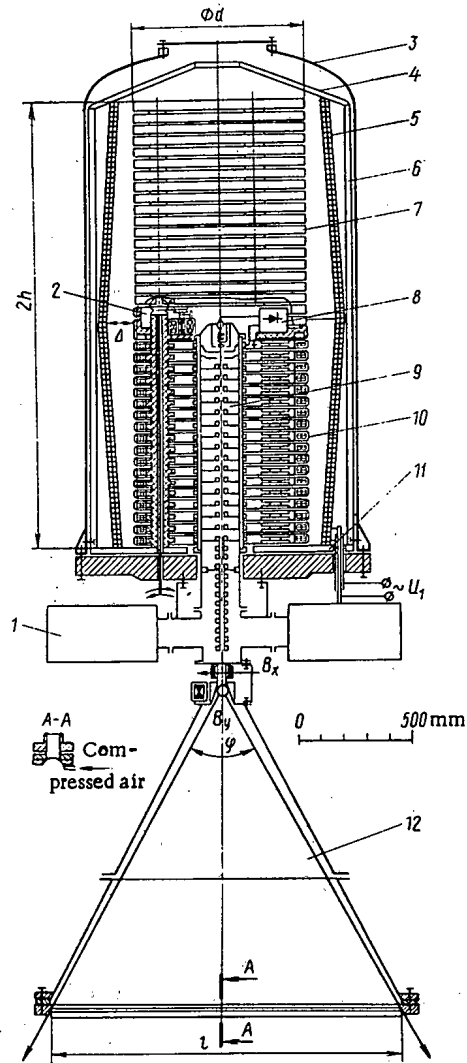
Design of the ÉLV-3: 1) vacuum pump; 2) high-voltage electrode; 3) case; 4) conical magnet; 5) primary winding; 6) cylindrical magnet; 7, 10) rectifier sections; 8) control unit; 9) accelerator tube; 11) disk magnet; 12) output section.
